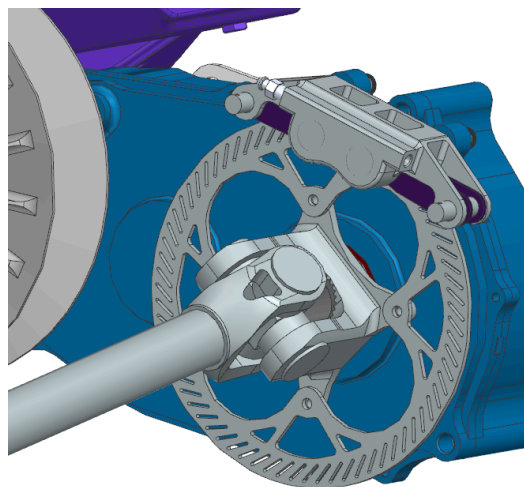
Custom rear brakes developed by the MBR Team. The brakes include floating calipers that hold brake pads in place and pistons that force the brake pads around a disc rotor attached to the wheels to decelerate the car through friction.
